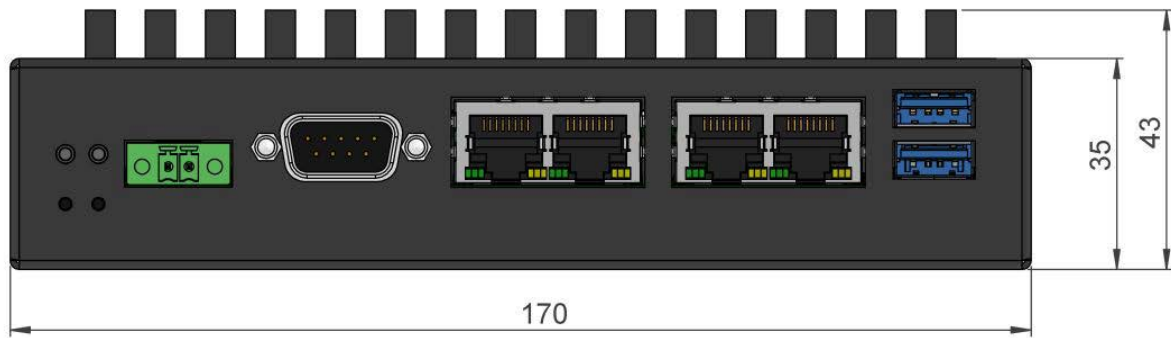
Industry Computer MBox-Advanced-E41M Dimensions, Front
